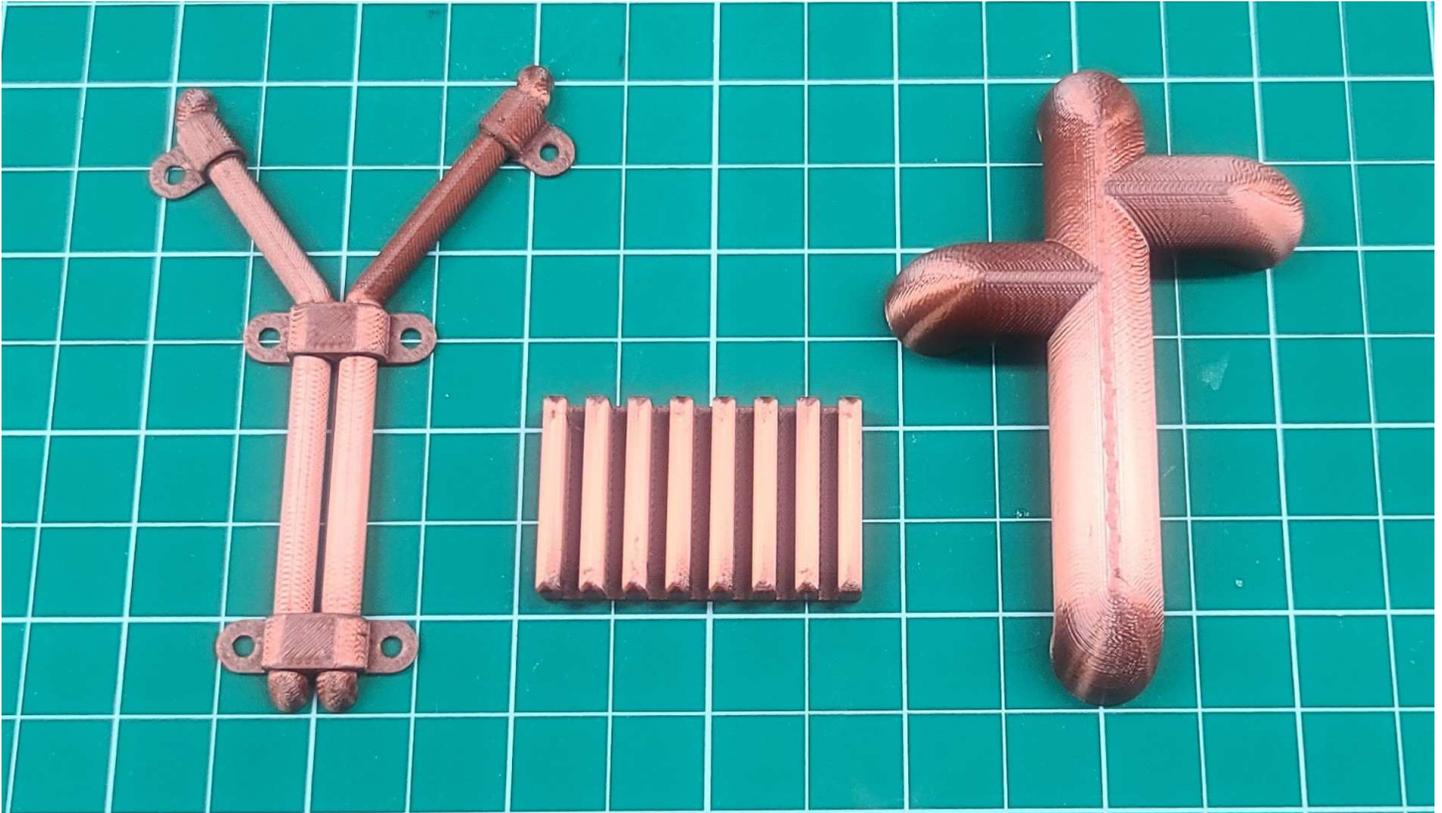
Steam Machine Puzzle Box Copper Silk PLA Parts
